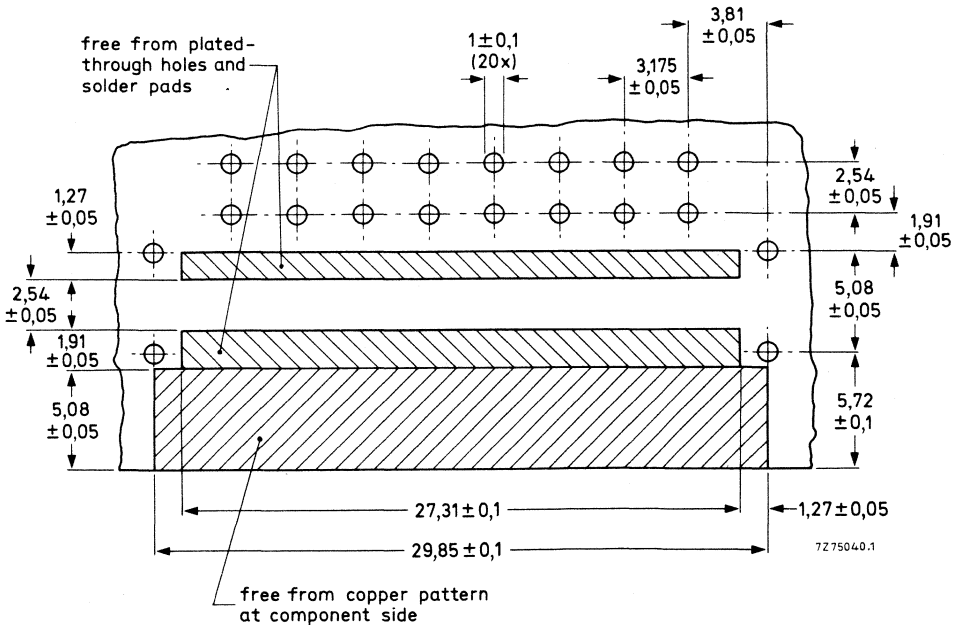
Hole pattern for the spring contact box with 16 pins.
